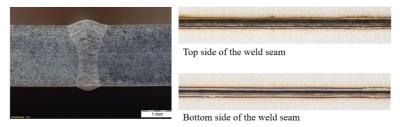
Cross section (left), top side and bottom side (right) of a full penetration weld of a 2 mm stainless steel sheet performed with BrightLine Weld at a feed rate of 12 m/min.
